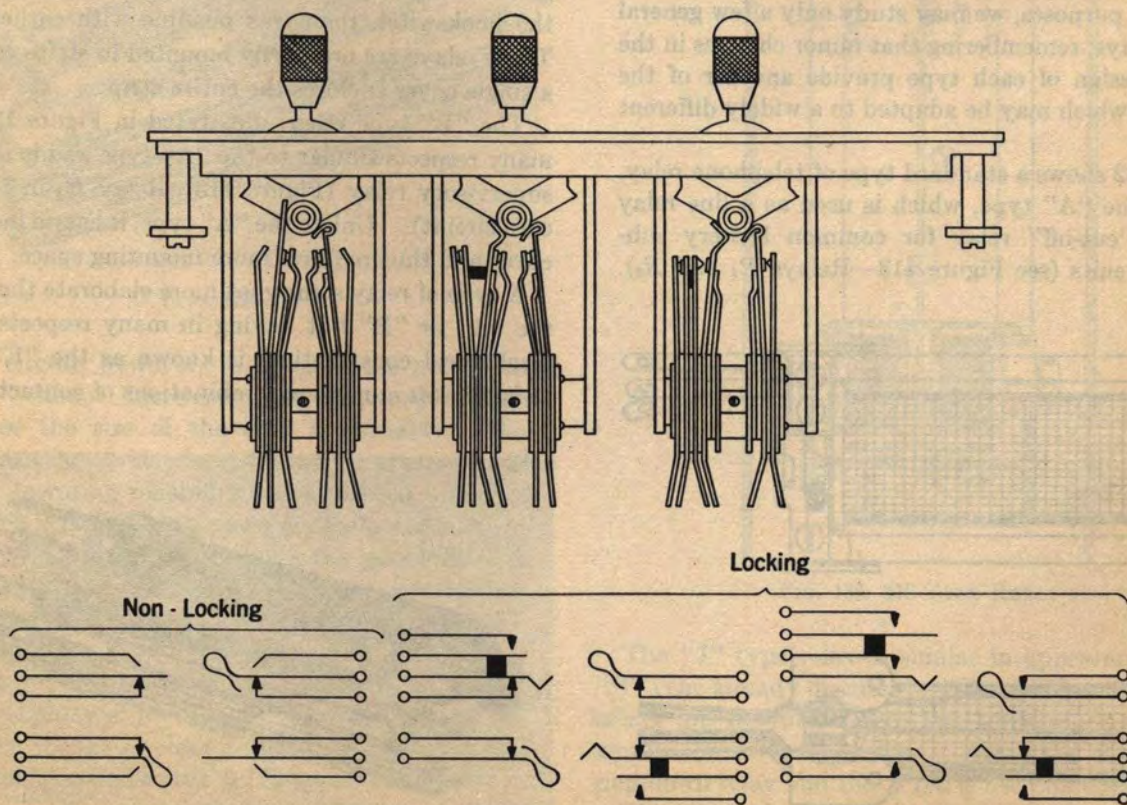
STANDARD SWITCHBOARD KEY ASSEMBLY
